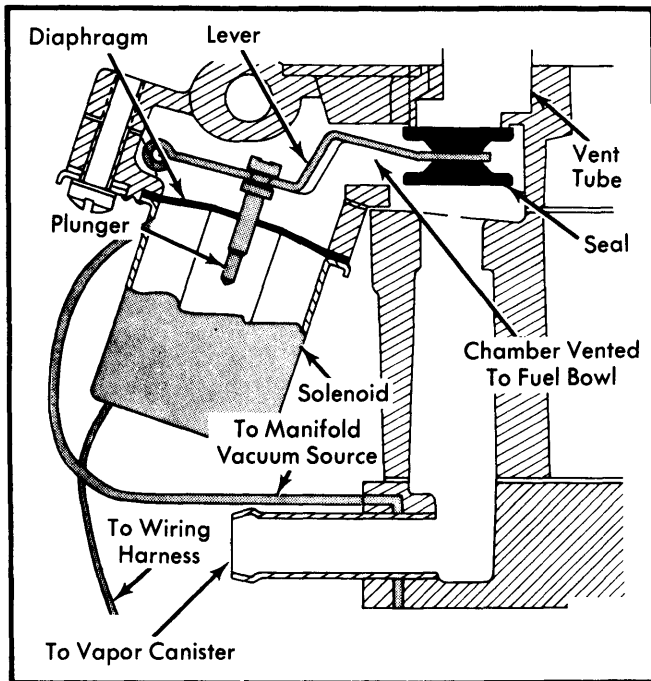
Cutaway View of Solenoid Vent Valve for Checking Vent Valve Operation
